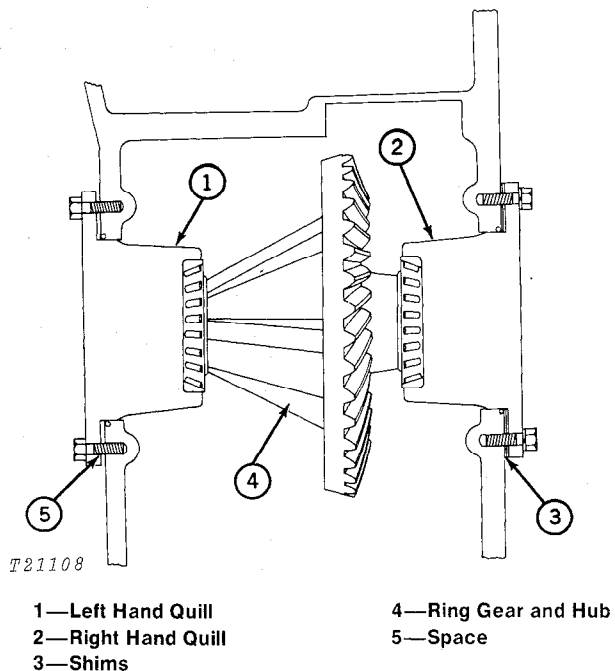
Ring Gear and Hub Bearing Preload Adjustment
